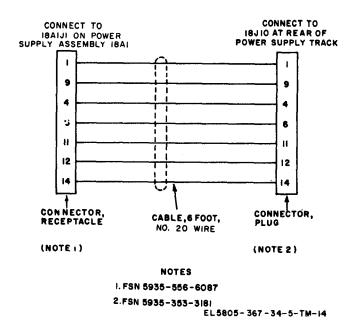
Power supply assembly 18A1() electrical test cable assembly, schematic diagram.
